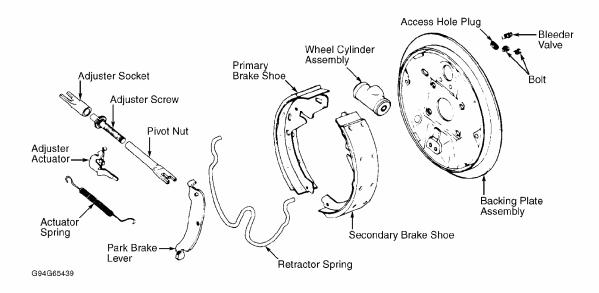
Exploded View Of Rear Brake Shoe Assembly (Montana, Silhouette & Venture)
